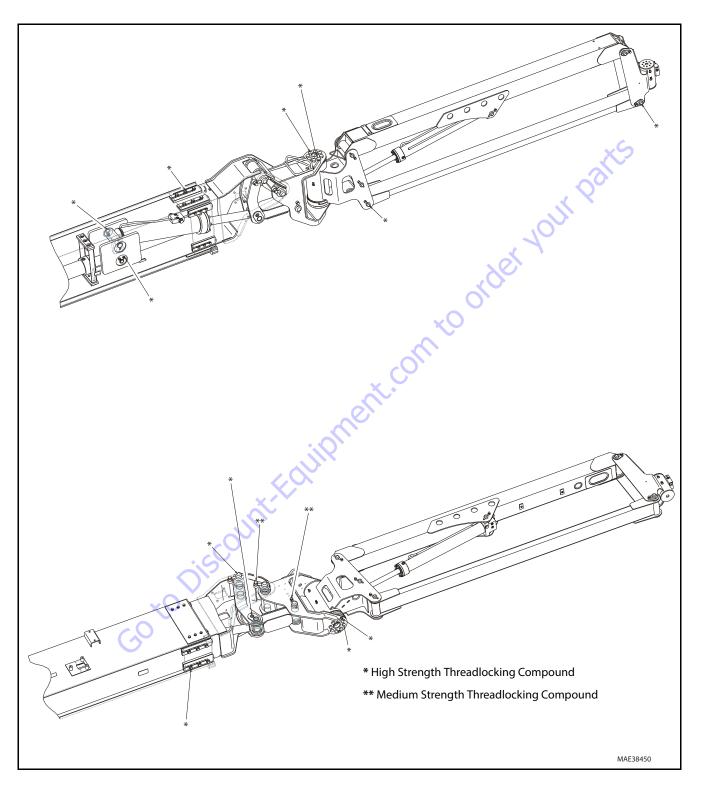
Locations for JLG Threadlocker Application - Sheet 1 of 5
